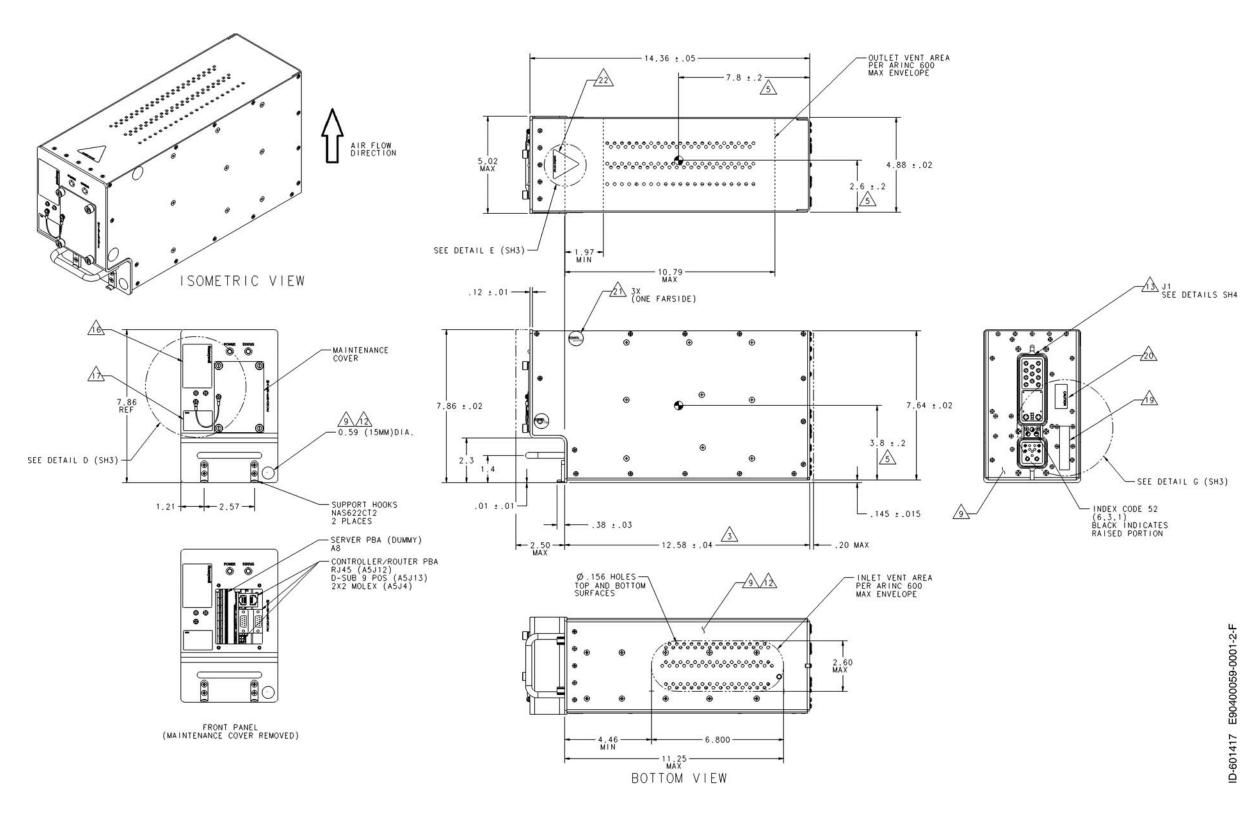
(Sheet 2 of 4) Modman Outline and Installation Drawing (90400059-0001, REV F)
